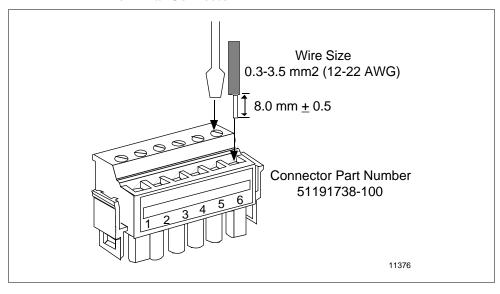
Crimp-Pin Galvanic Isolation Module Terminal Connector
